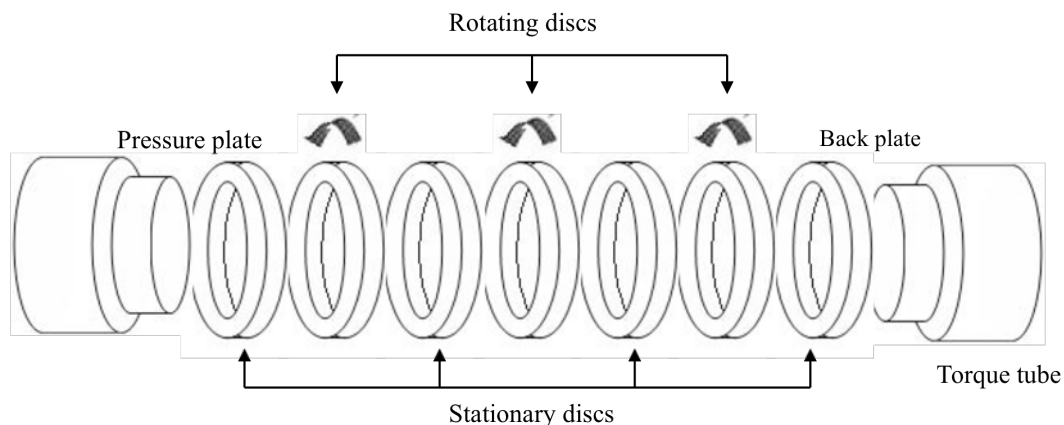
Schematic exploded view of an aircraft brake disc pack.
